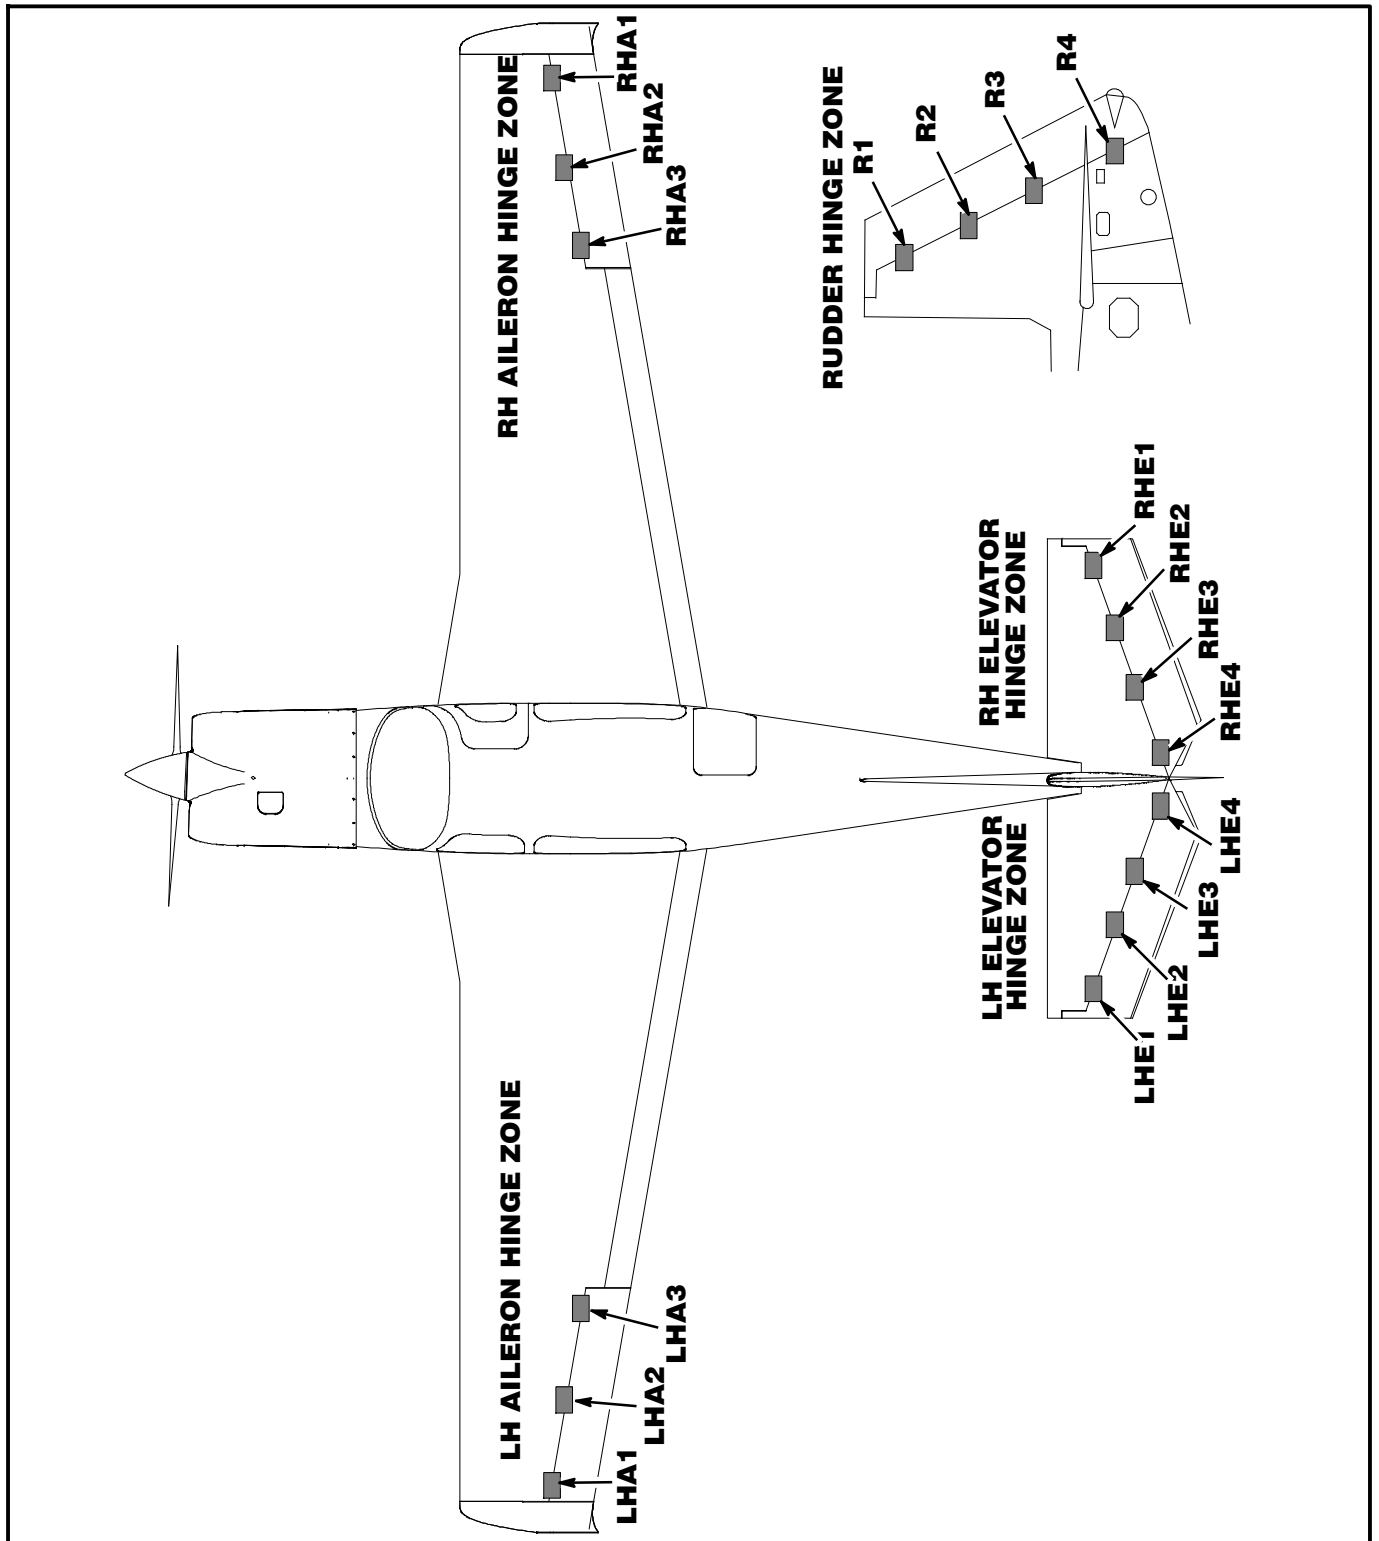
OVERALL LOCATION OF CONTROL SURFACE HINGE ZONES
